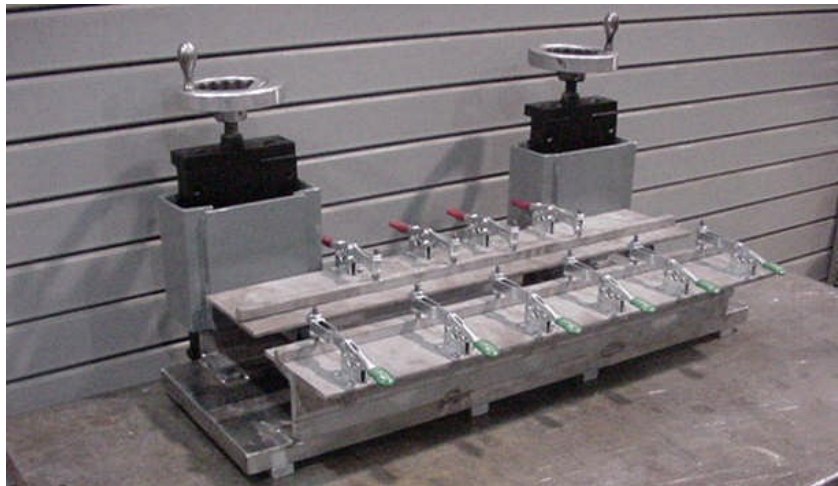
Standard Fixture for Lap-Fillet Joints
